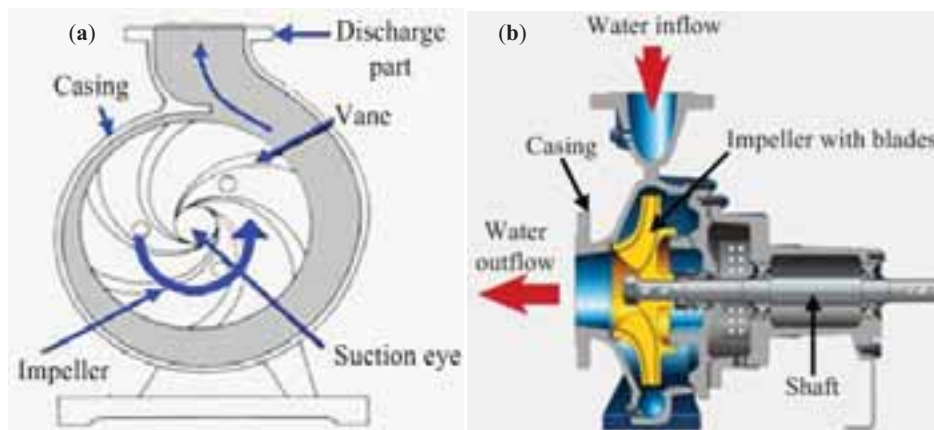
Principle operation of pump. (a) sectional view of pump showing main parts (Chaurette, 2005). (b) sectional view of pump in reverse mode showing the direction of water flow and shaft connected to impeller (Orchard, 2009)
